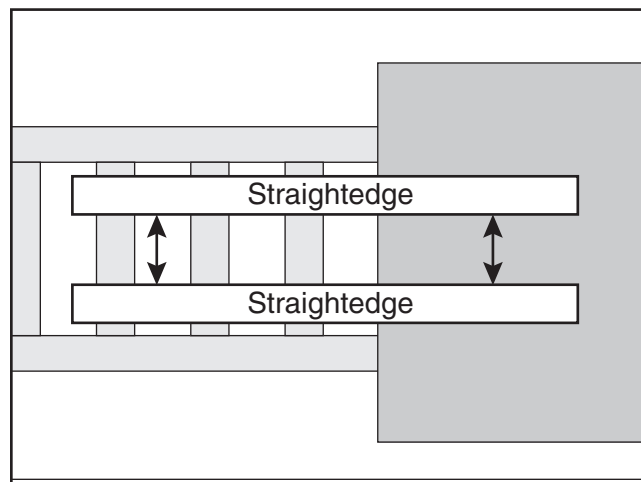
Straightedge positions for checking and adjusting front and back of roller table.
